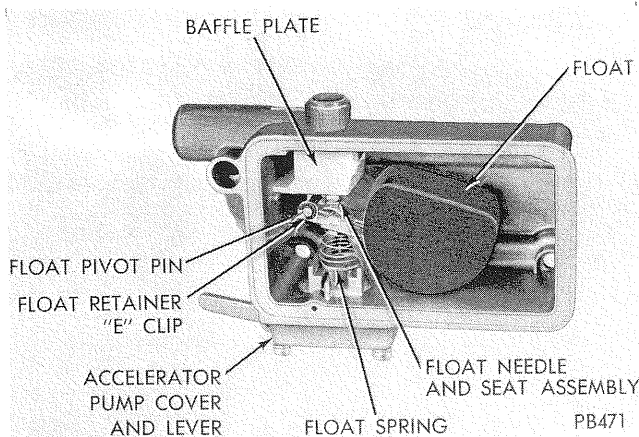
Fuel Bowl Assembly Internal Fuel Inlet Valve
